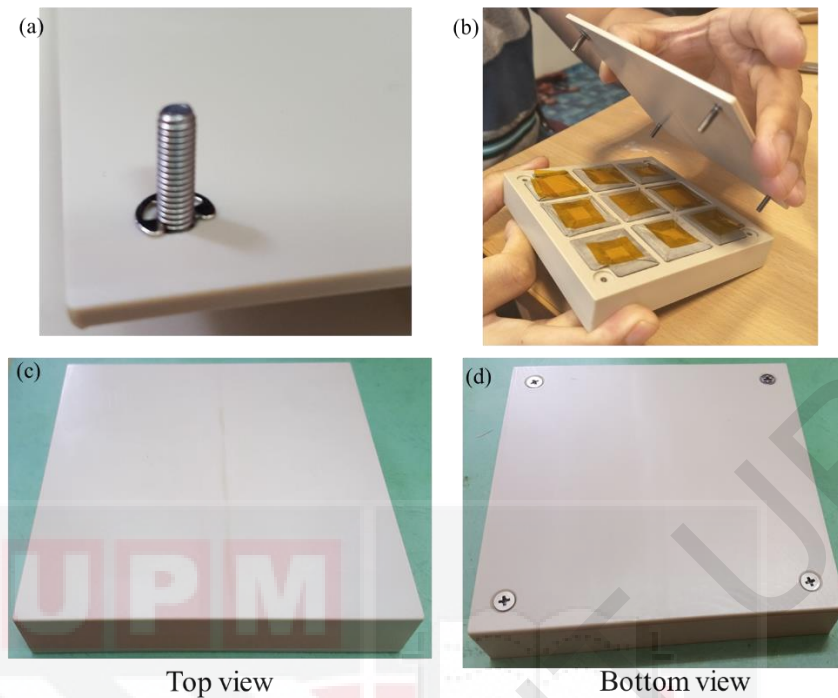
Assembly of SOFPADS. (a) Attachment of screws onto MB1
